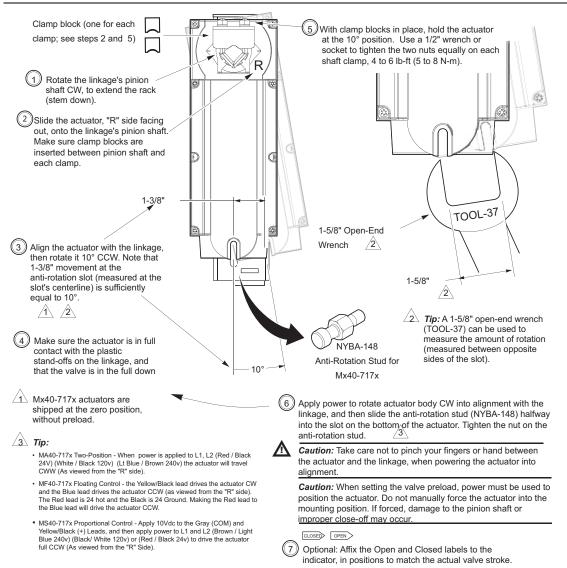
Mounting Mx40-717x and Setting Up Actuator/Linkage/Valve
